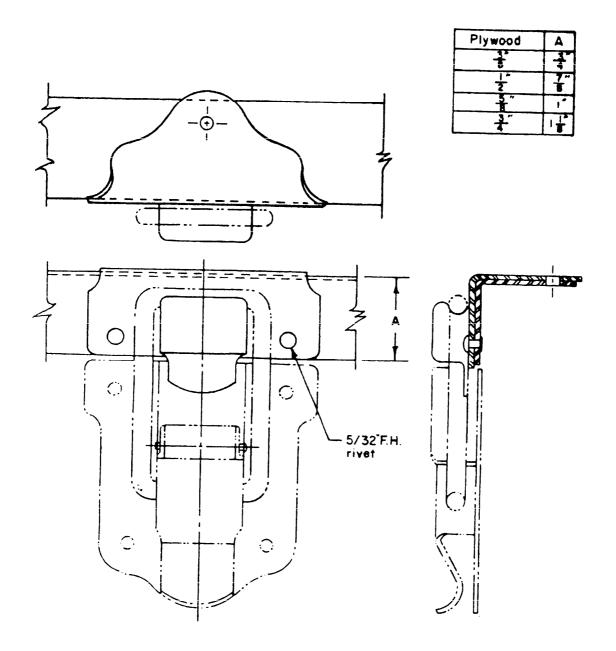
METHOD OF JOINING DRAWBOLT TO COVER BINDING ANGLE
